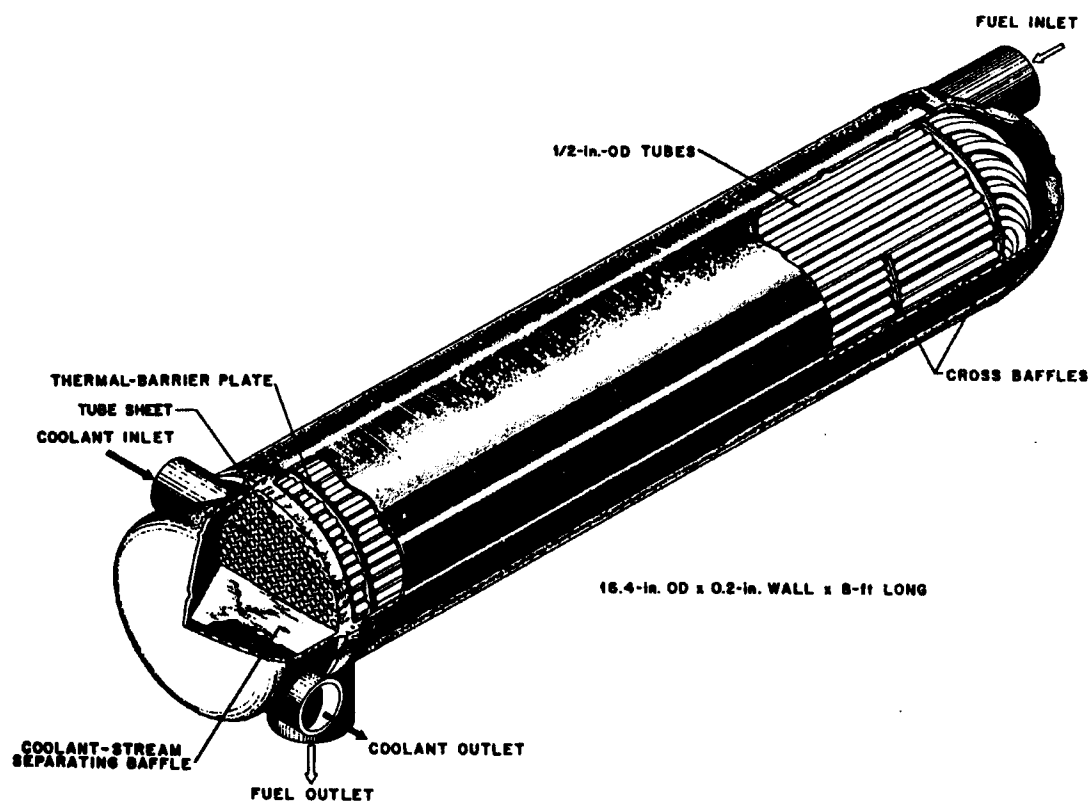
Heat exchanger with cutaway view showing tube sheet [2.1].
